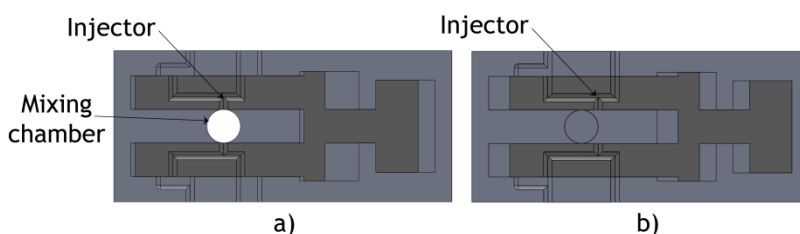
Slide valve mixing head: a) mixing position b) recirculation position (Bolde and Schulte, 1994)
